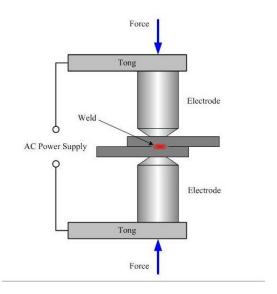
Arrangement of the electrodes and work pieces in resistance spot welding
